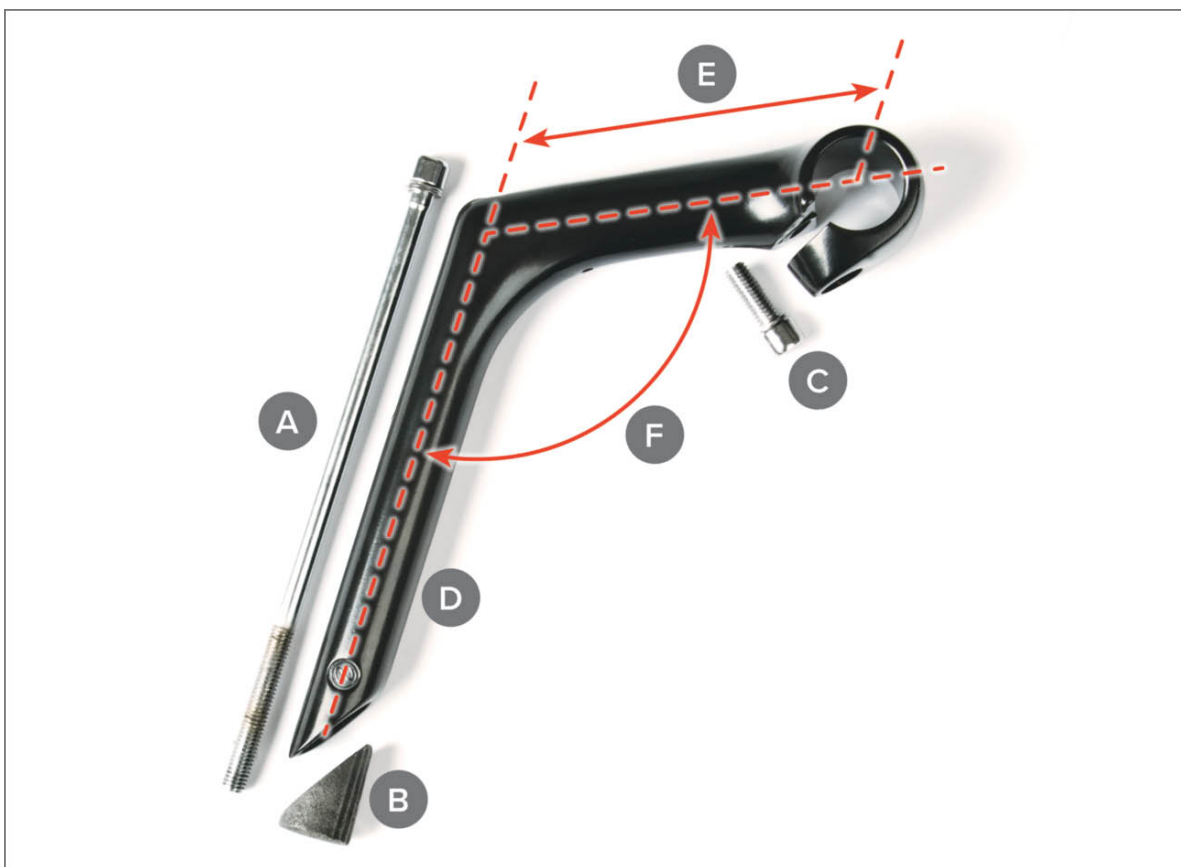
Quill stem: (A) stem binder bolt, (B) stem wedge, (C) handlebar binder, (D) quill section of stem, (E) stem length, (F) stem angle
